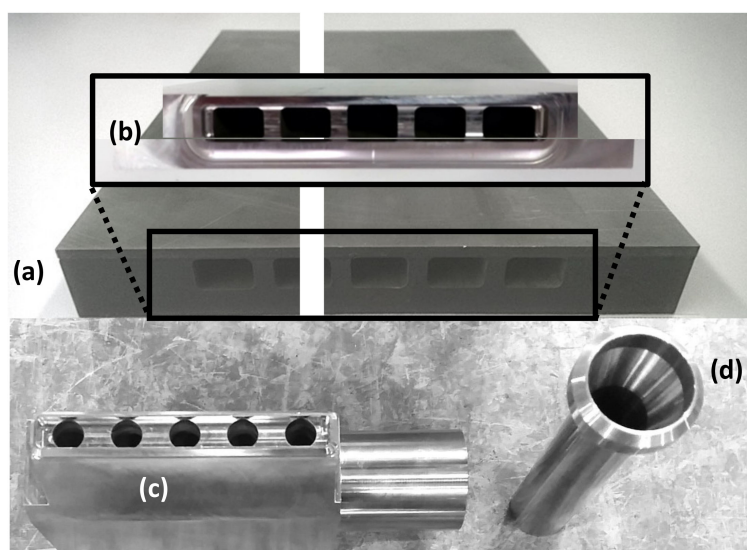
(a) The ODS plated mock-up block with the machined cooling channels; (b) connection milled in the mock-up plate on both ends of the cooling channels (indicated by lines); (c) connector part; (d) reducer.
